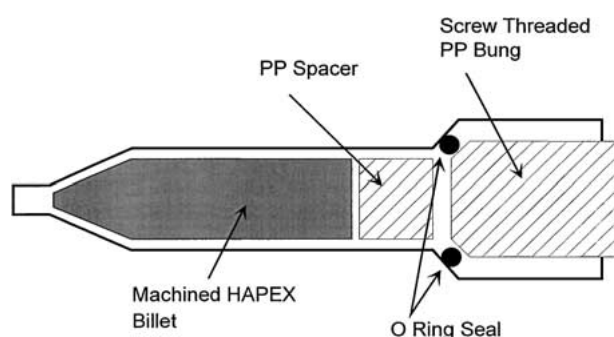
Schematic representation of the Polypropylene jacket and HAPEX™ billet assembly.
